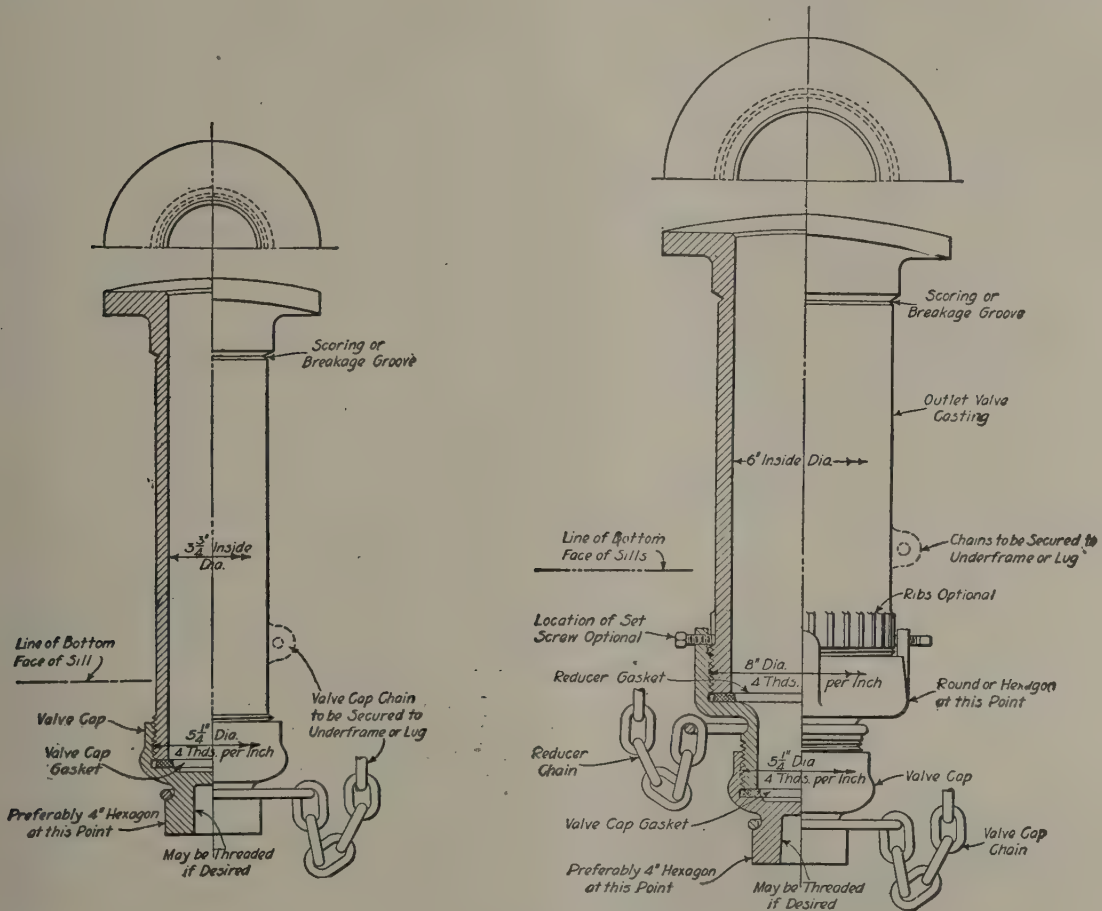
ARRANGEMENT OF BOTTOM OUTLET.
